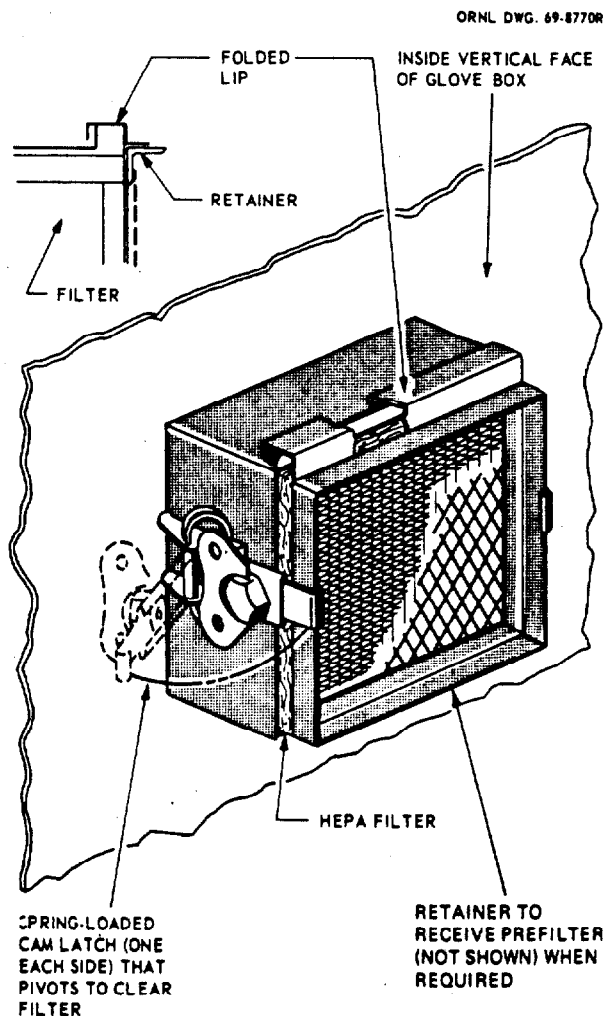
Inside glove box open-face HEPA filter mounting arrangement with cam latches.
